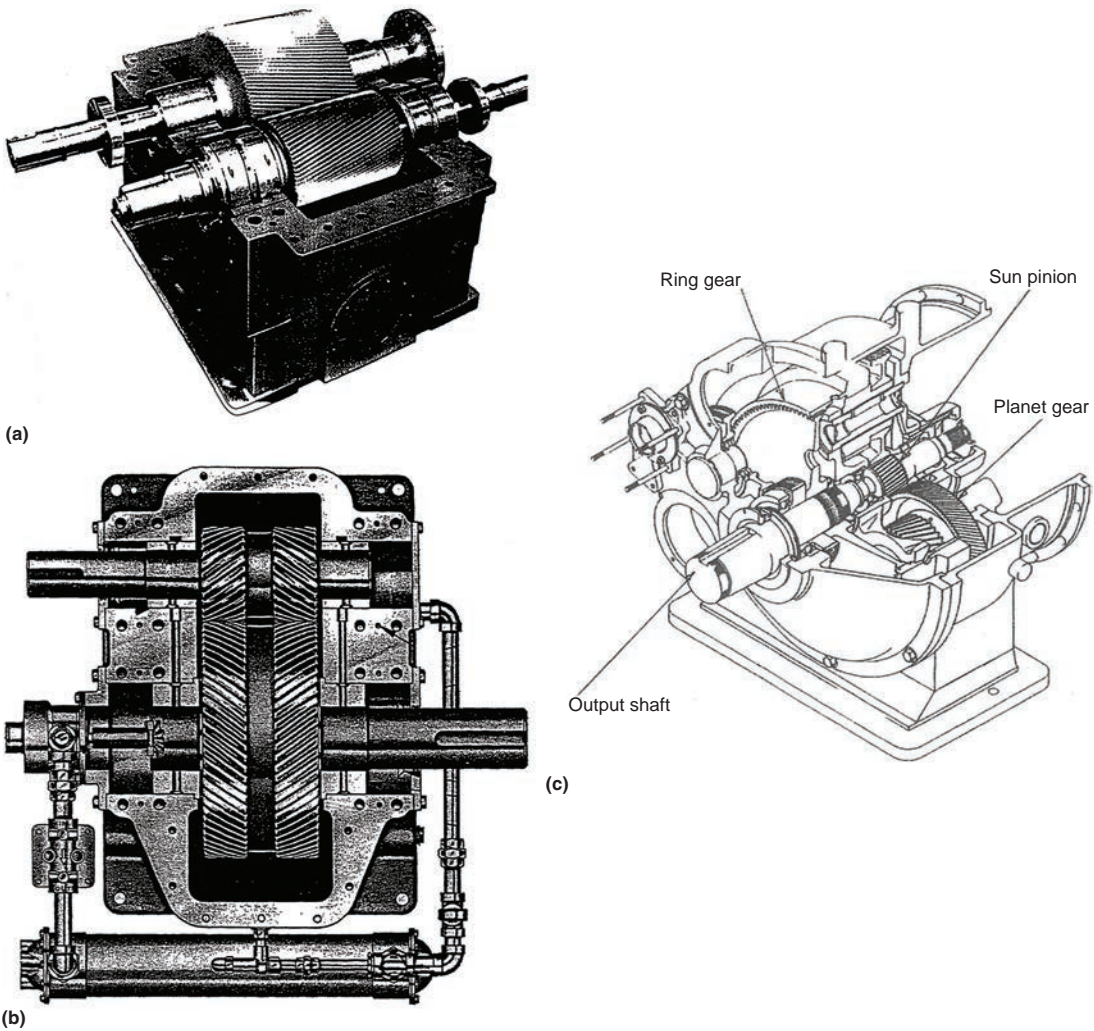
Offset parallel gearbox with (a) single and (b) double helical gears. (c) Epicyclic gearbox
